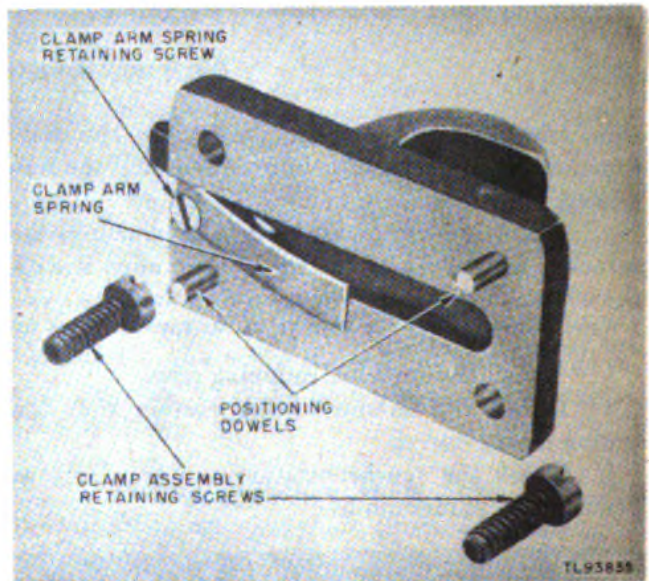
Parallax adjustor assembly removed from base plate, clamp arm spring partially removed.
